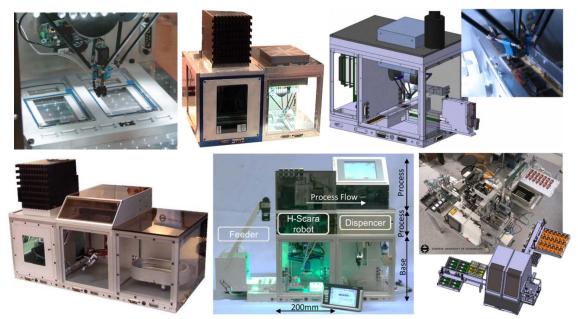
Mobile phone loudspeaker assembly (Heikkilä et al., 2007, p.170), Laser marking microfactory (Heikkilä et al., 2010, p. 121), Spring assembly (ibid., p. 123), Medical implant factory (Heikkilä et al., 2008), Gas sensor assembly system (Siltala et al., 2011), Integrated mobile phone assembly (Tuokko & Nurmi, 2011, p. 7)
